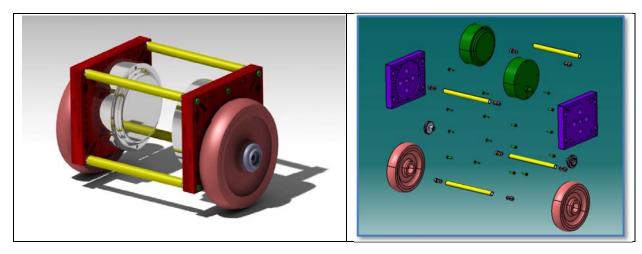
(a) New design of wheel mobile robot (b) New wheel mobile robot modified design for assembly exploded view (36 parts).
